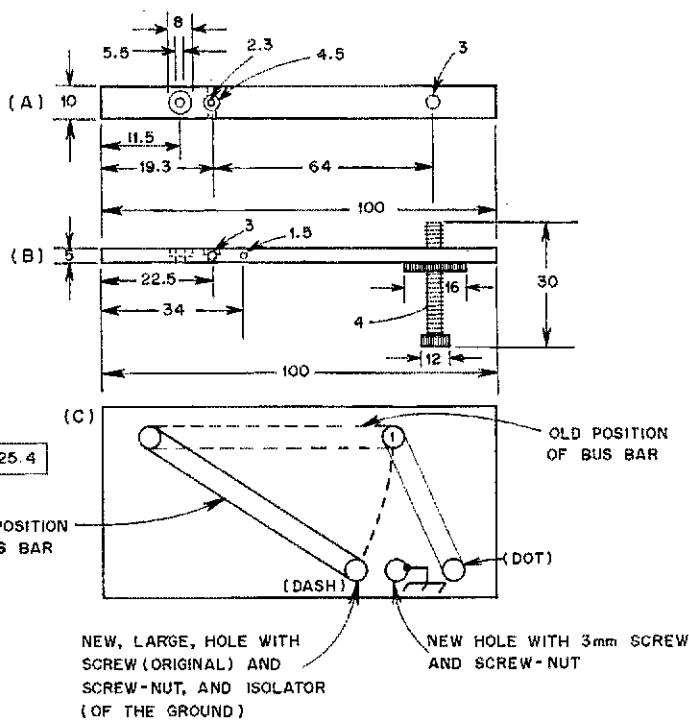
These simple modifications are for converting a Vibroplex-type key into a paddle for use with an electronic keyer. Dimensions for the new bar required for this modification are shown in A and B. On the bottom of the key the bus bar shown in heavy lines is moved to the position indicated. The output terminals are at the lower right in the drawing at C. Holes for the original terminals may have to be enlarged to accommodate insulating sleeves, which can be made from plastic tubing or other material. A new hole must be made for the ground connection. Measurements are in millimeters.
